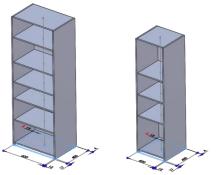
Framework controlling the dimensions of the assembly model $% \left({{{\rm{T}}_{{\rm{m}}}}} \right)$
